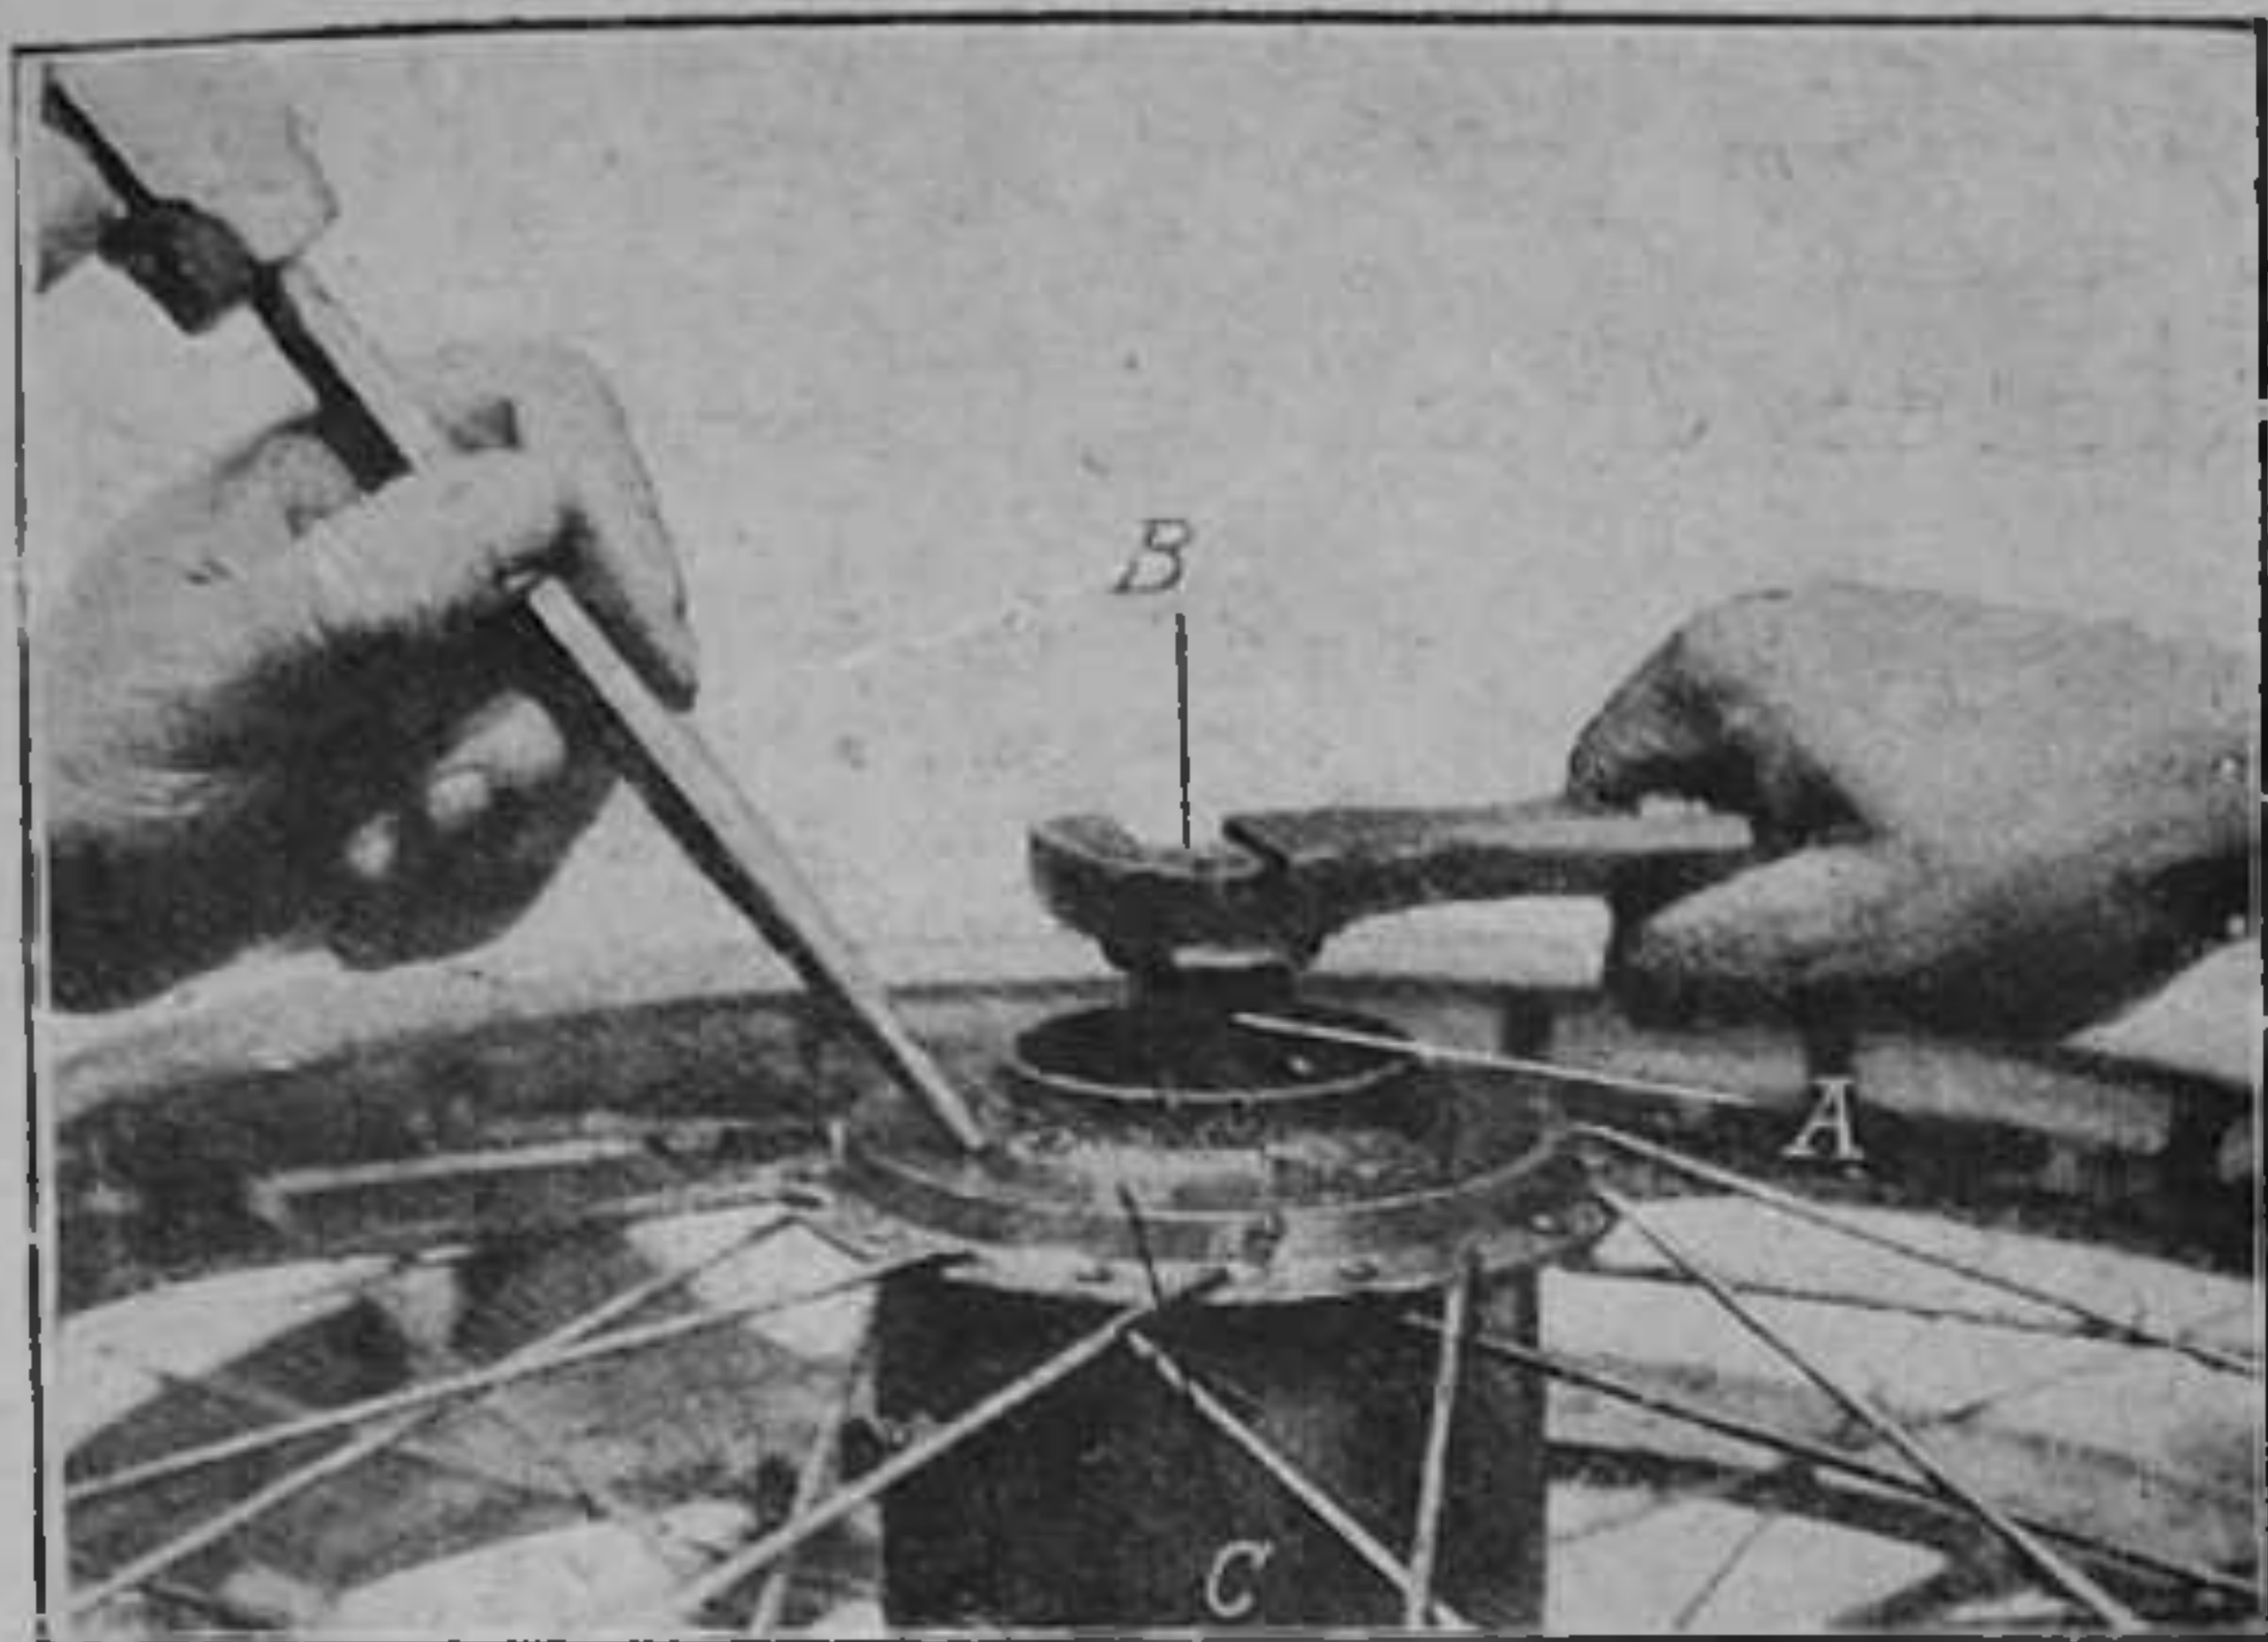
Removing the clutch plates is made easier by compressing the springs first.
